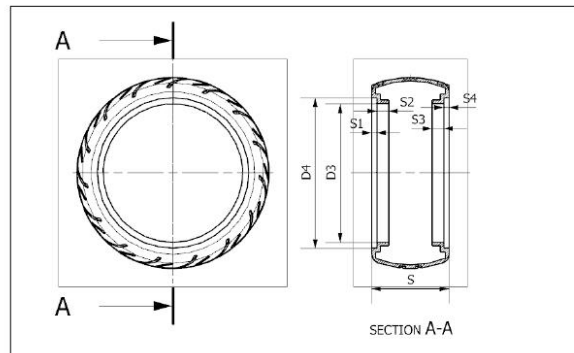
2D drawings of the tyre part with dimensional descriptions
